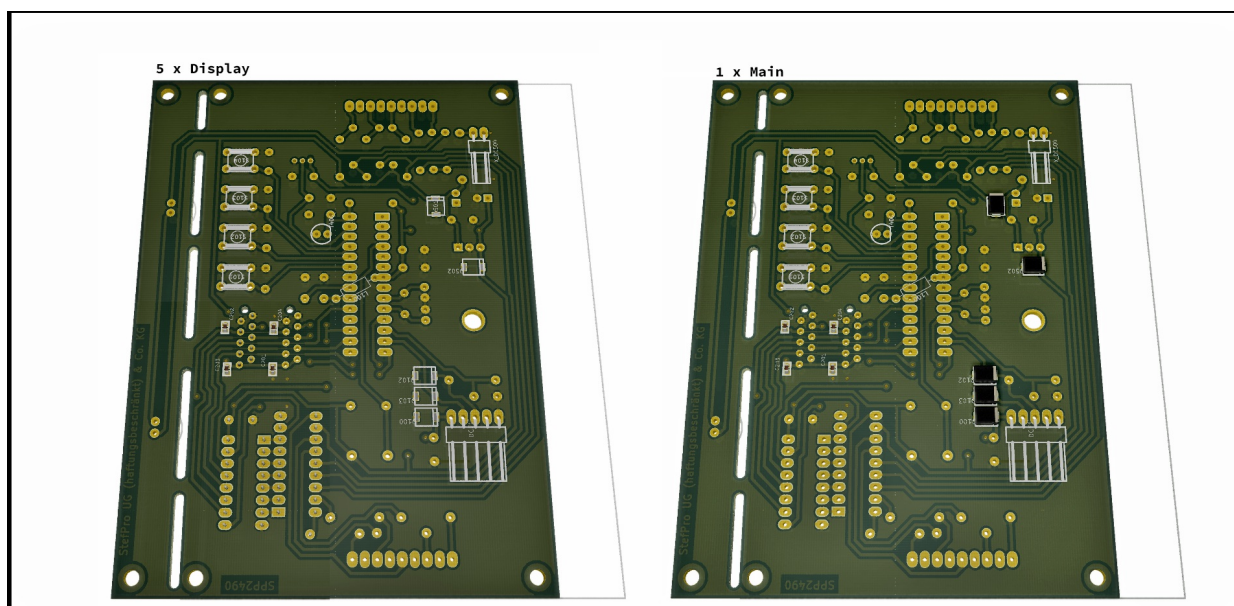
Basic SMD assembly of SPK2141.02 step 1
